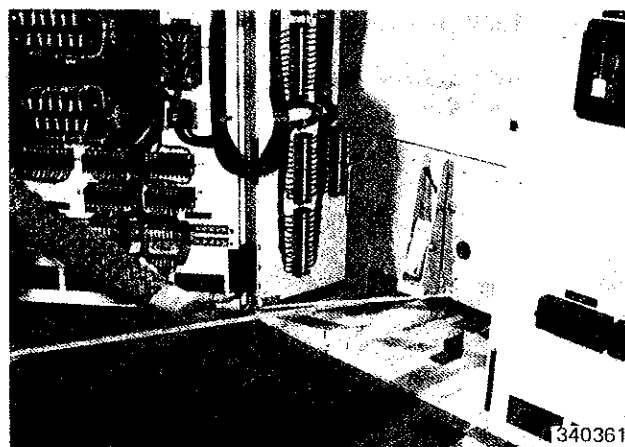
Placing Racking Strip Extension in Position – 15 kV Cubicle
